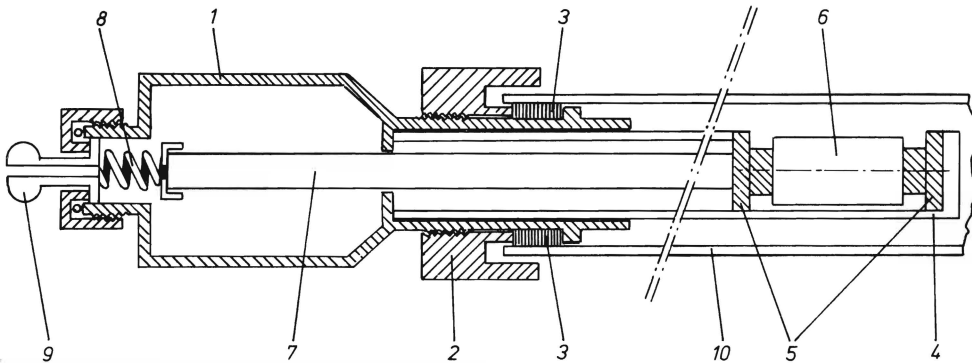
The clamping system and the test piece holder in the furnace tube.
